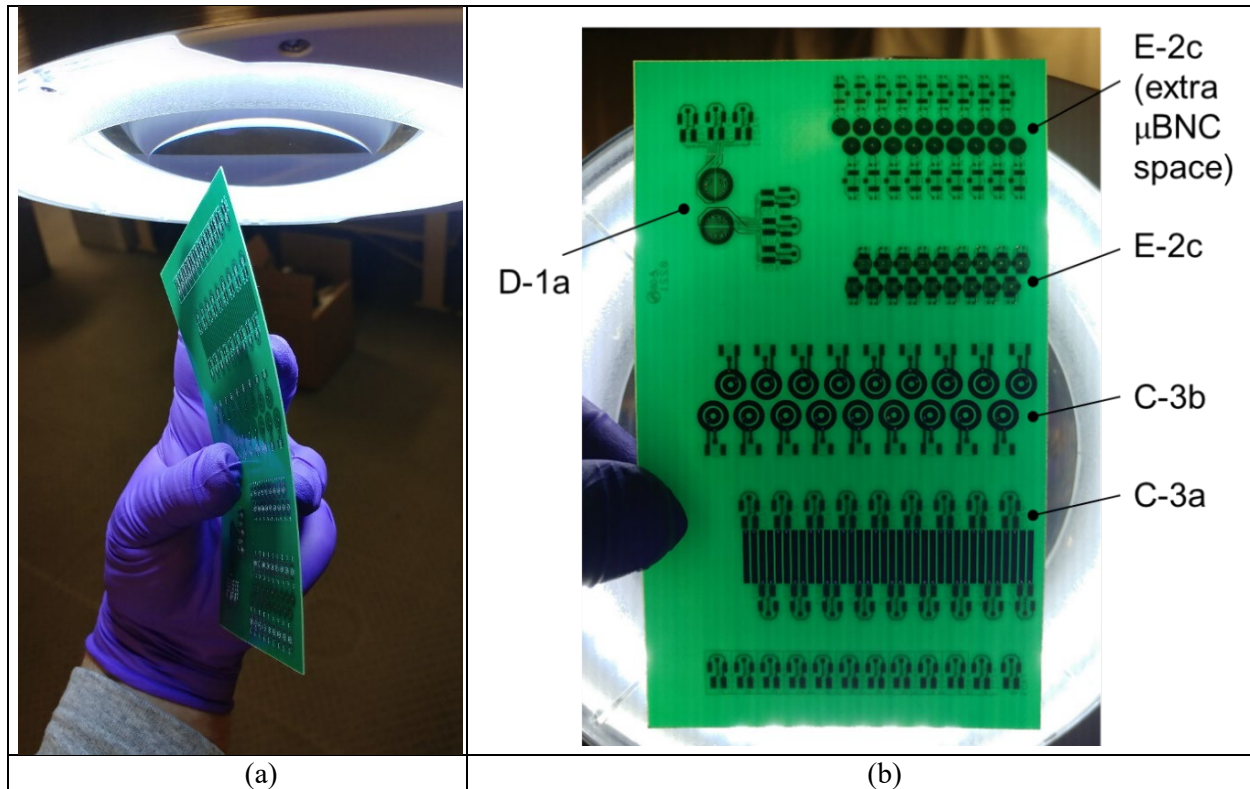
Fabricated 2-layer PCB with multiple sensors: (a) side view; (b) front view.
